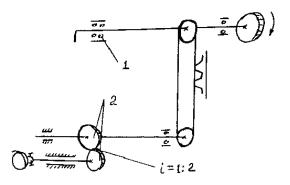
Schematic of the shuttle mechanism of a 1022-M class machine.
